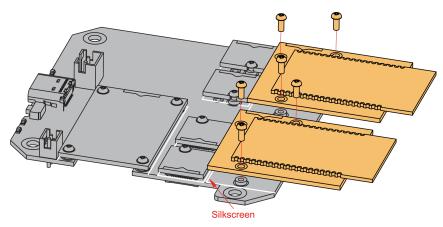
WisBlock IO silkscreen on the RAK19001 Base Board
